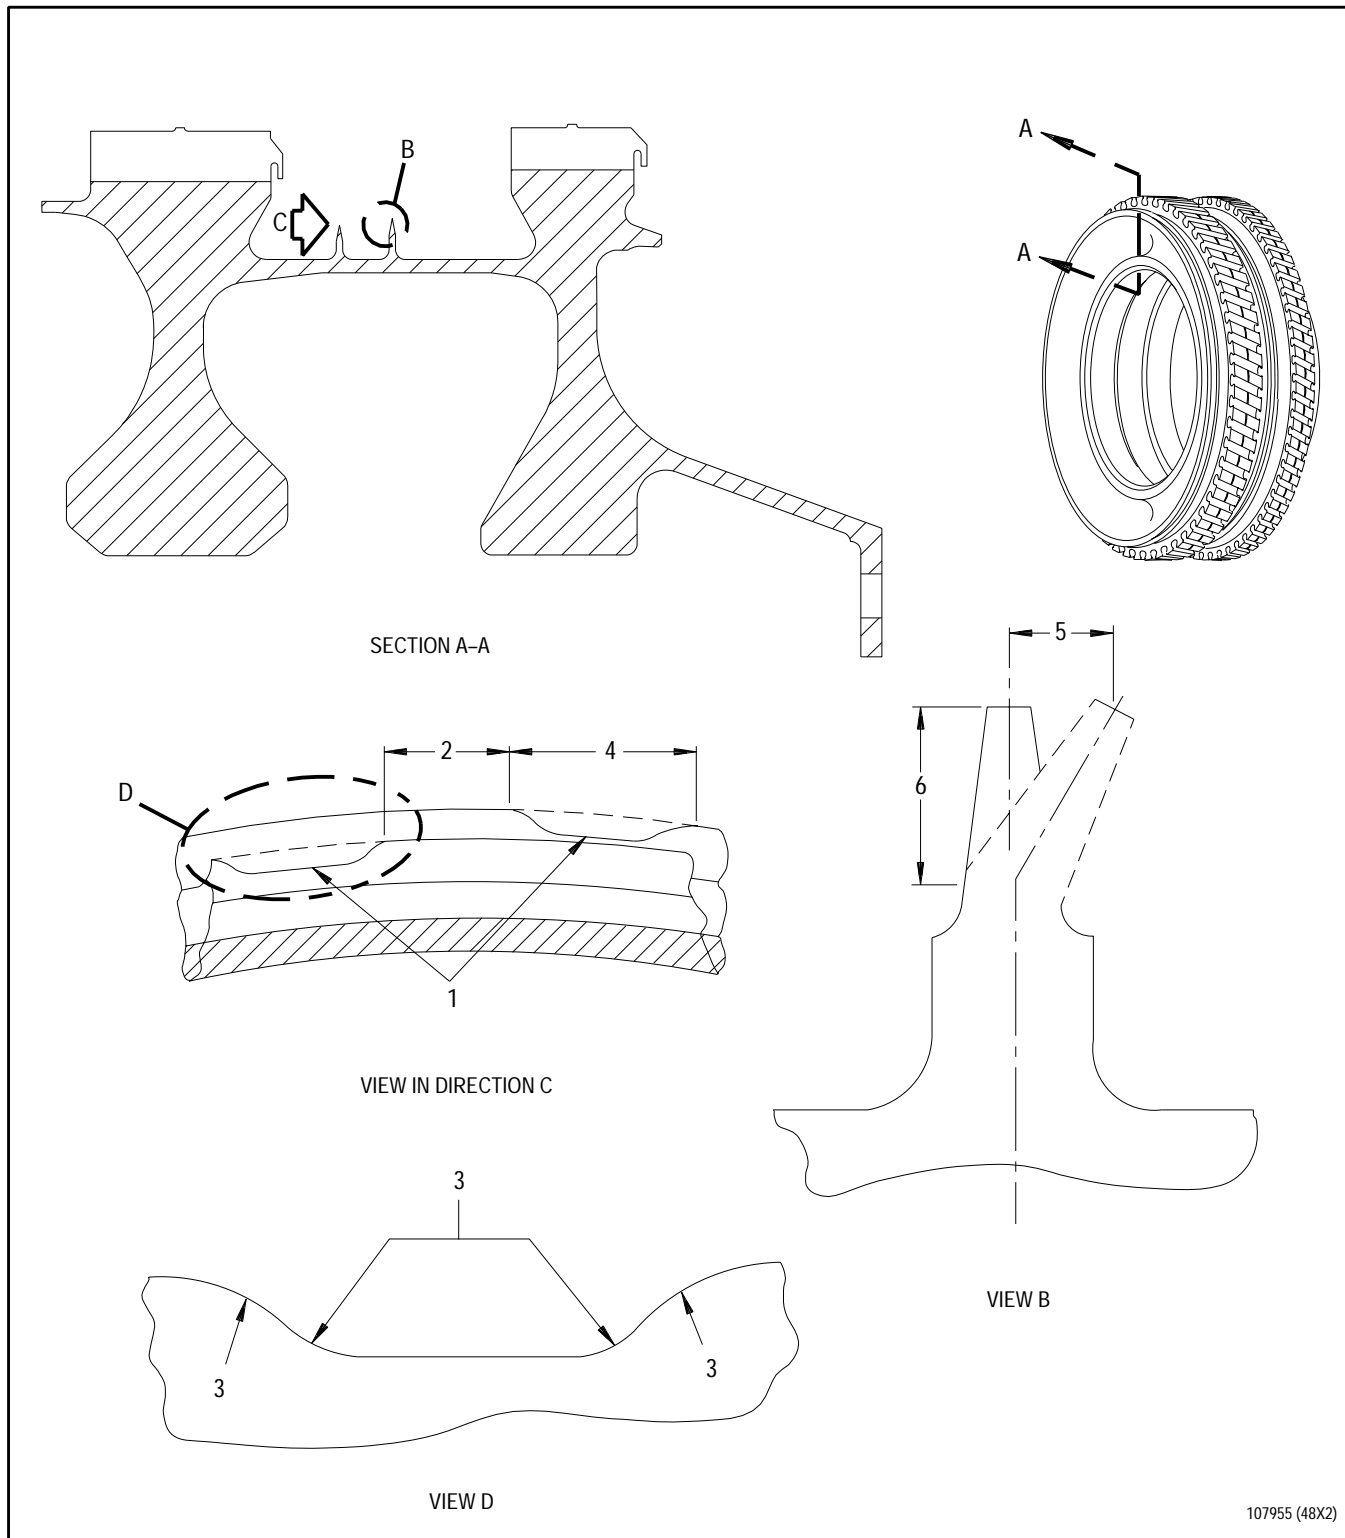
Rear Compressor Front Disk-Drum Rotor Assembly - Knife-Edge Blending
